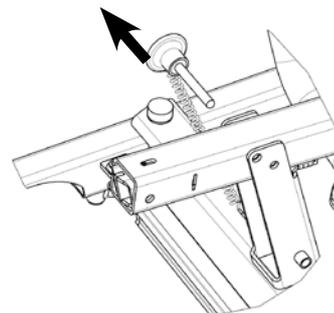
Zoom in of the magnetic locking shaft of the mast removed from its housing
